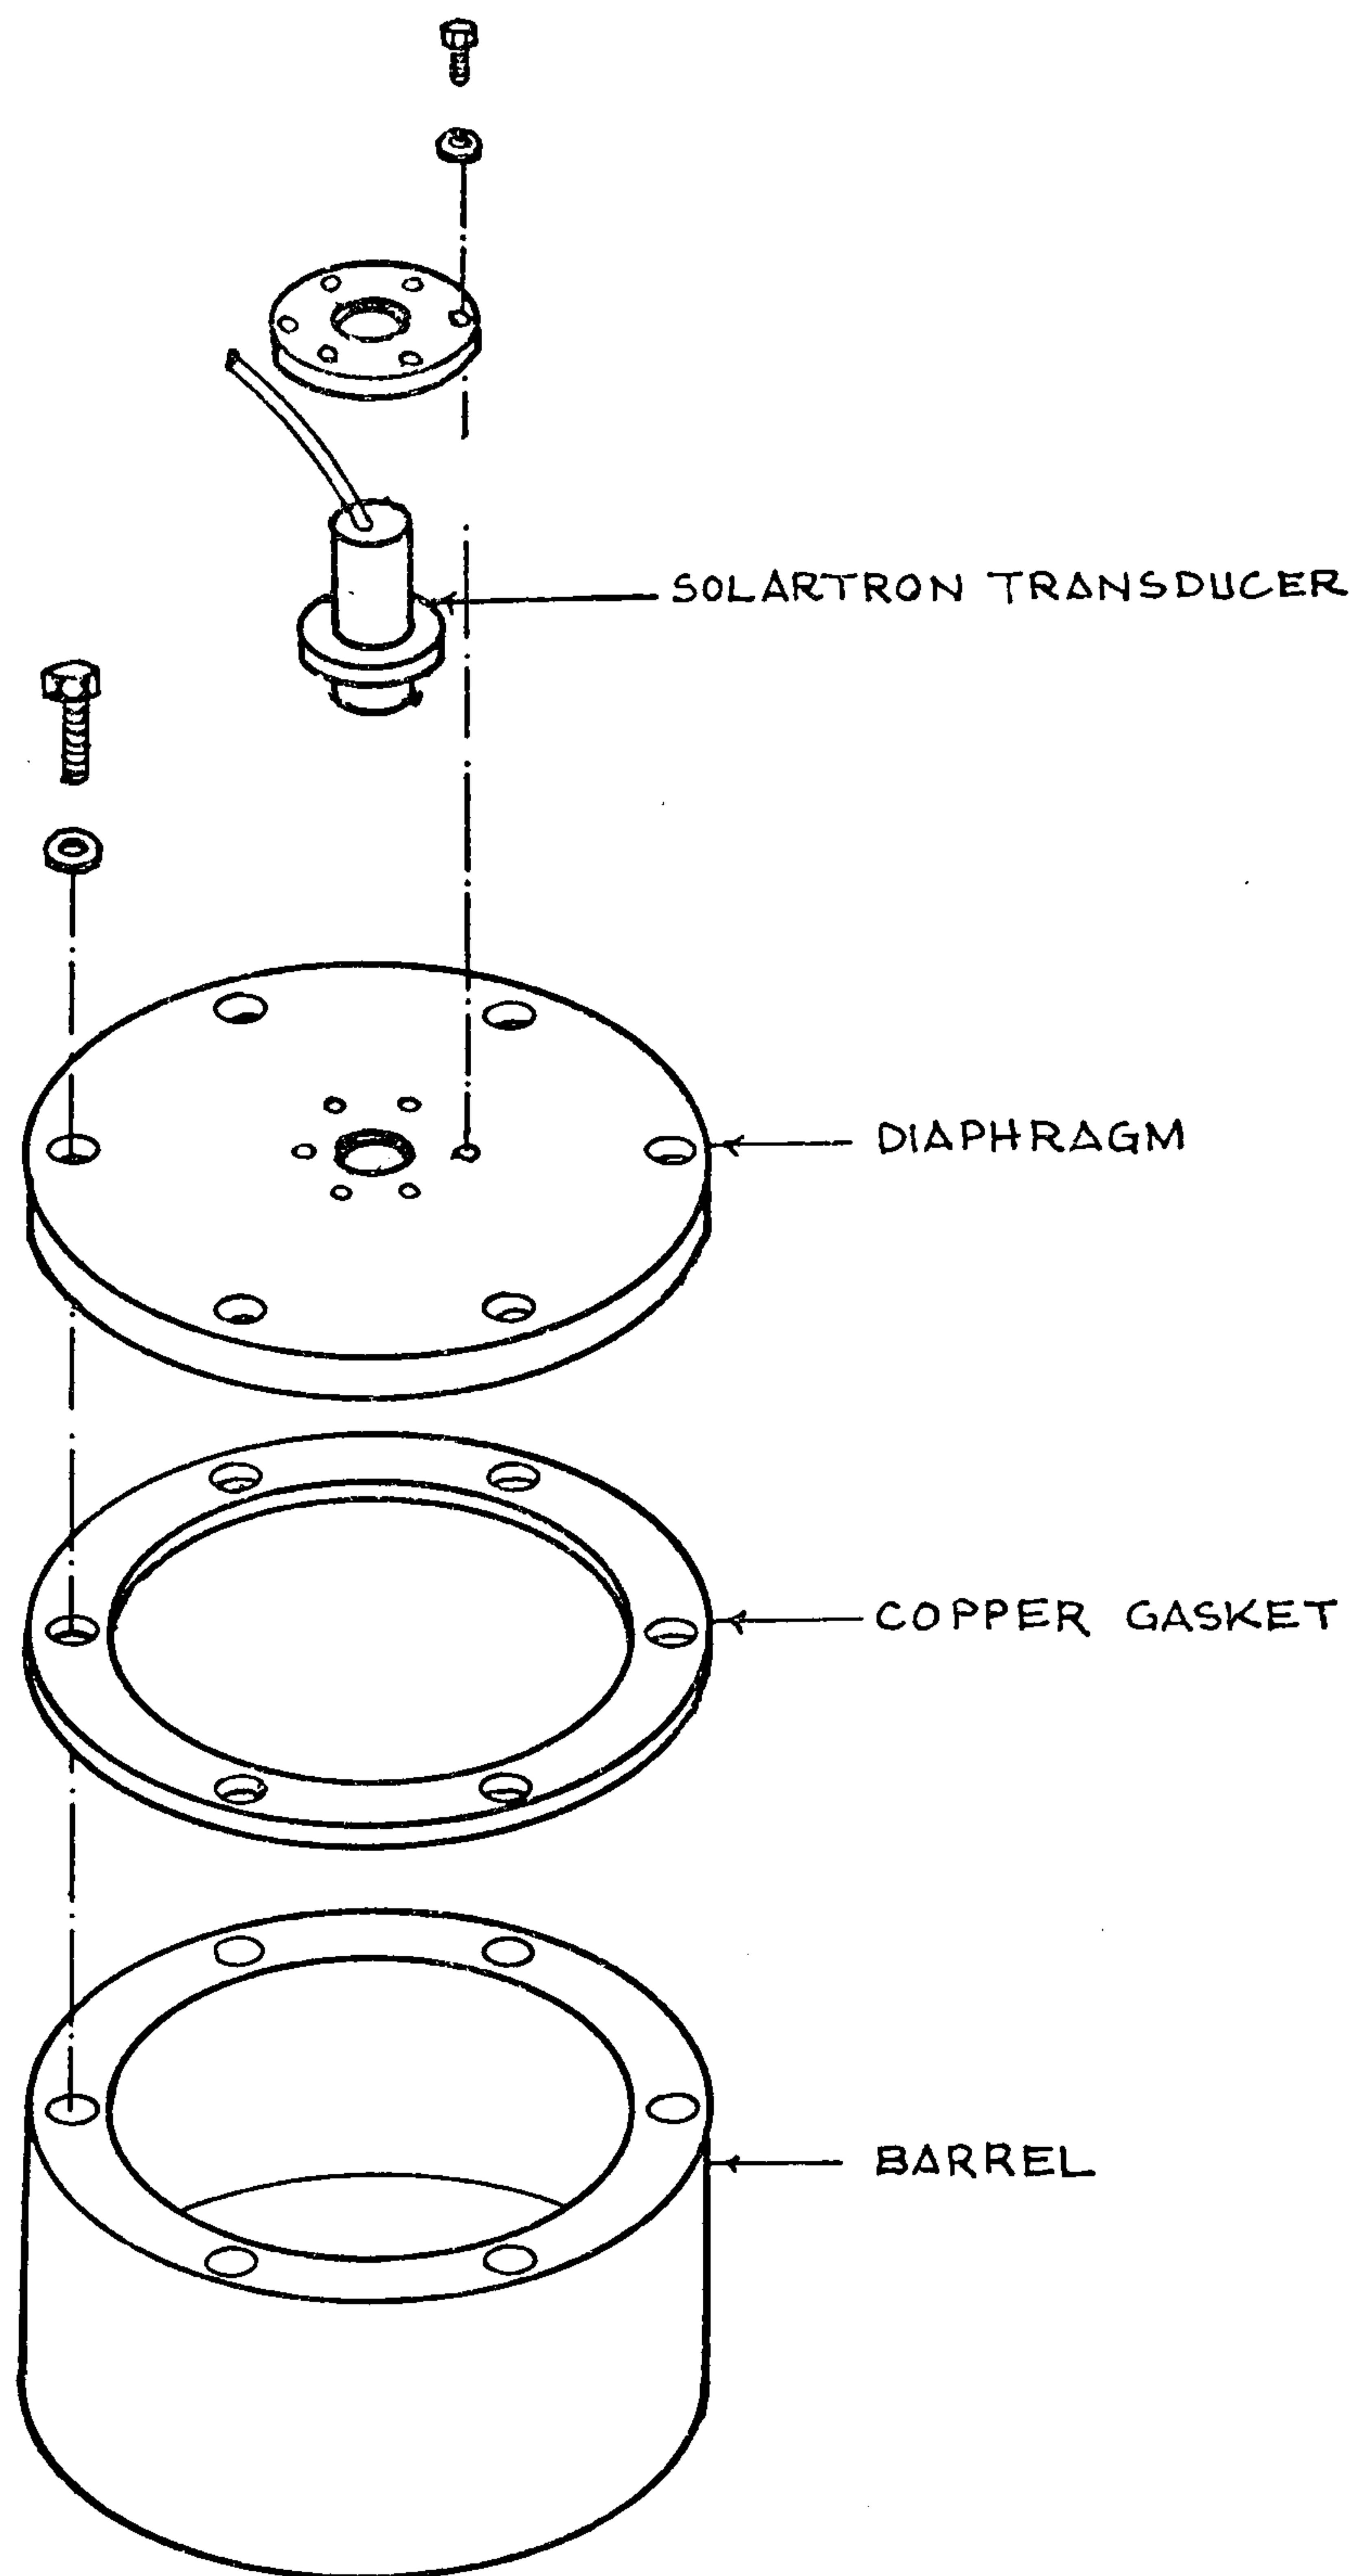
EXPLODED VIEW OF THE ORIGINAL PRESSURE CELL
